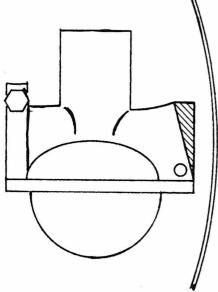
Carburetor intake may be trimmed as shown by shaded area to improve air flow.
